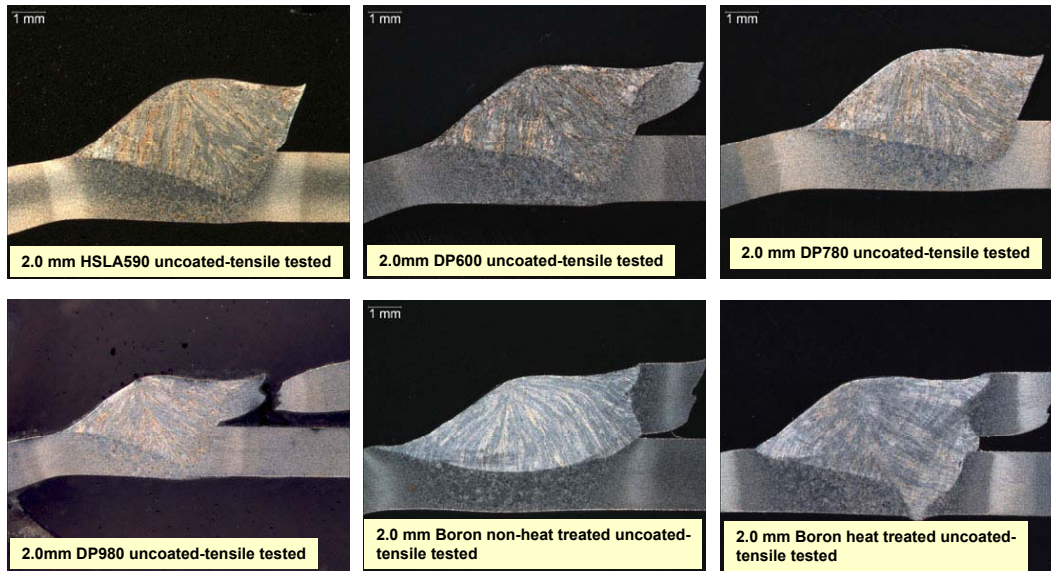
Failure locations of AHSS weld under static tensile loading.
